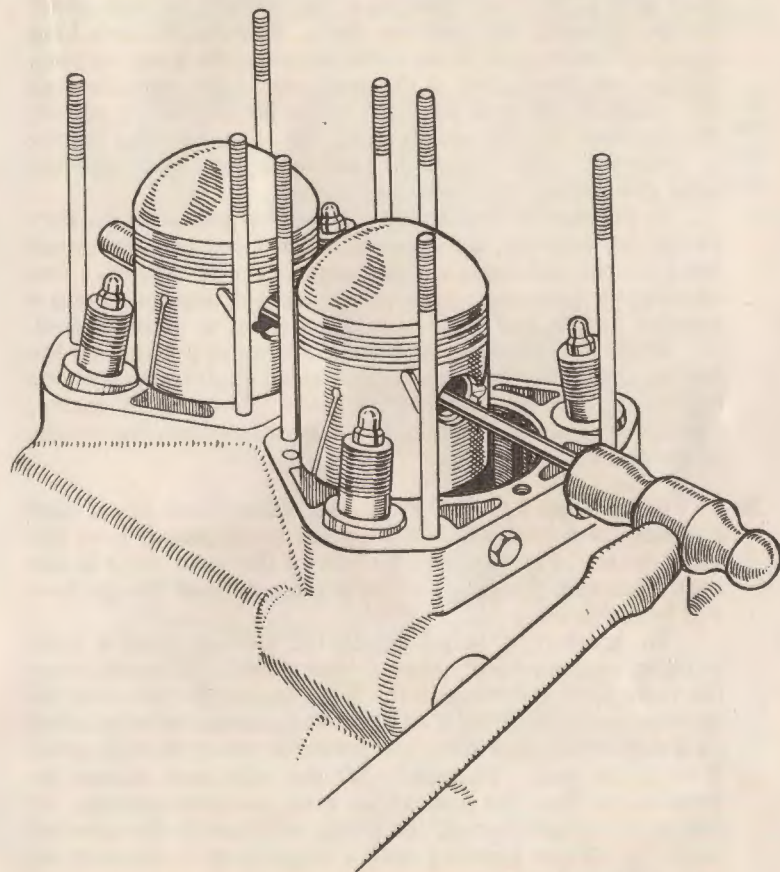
Positions in which the pistons should be held while the far gudgeon pin is being tapped out by a rod passed through the nearer piston.
